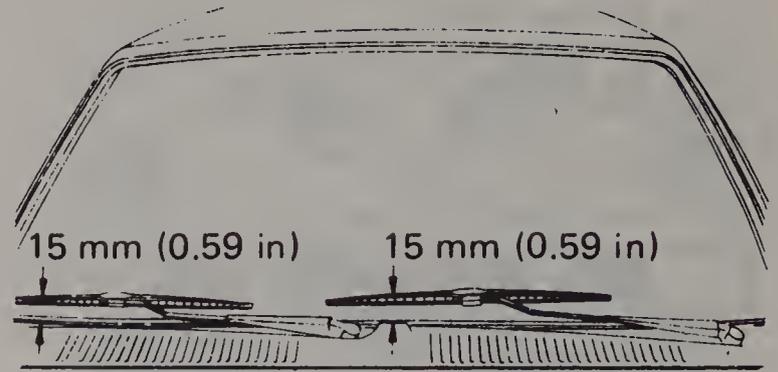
Correct position of wiper blades on windshield (Sec 46)
